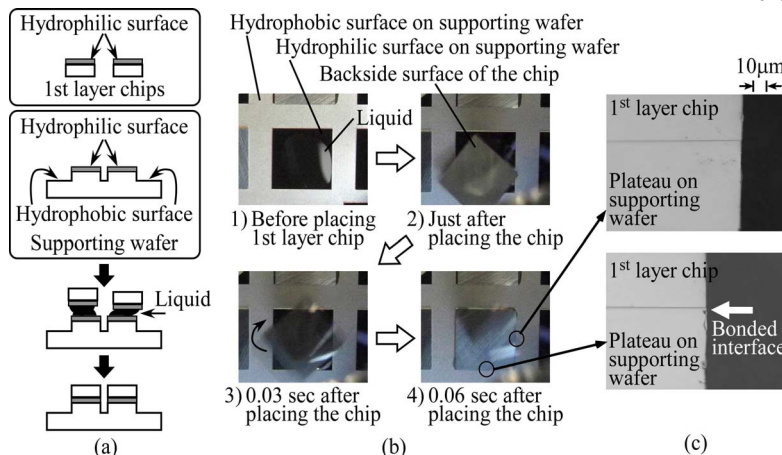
Self-assembly technique using surface tension of liquid (a), photographs for self-assembly events from a video (b), and SEM cross-sectional view of 1st layer chip bonded onto the plateau on supporting wafer (c).
